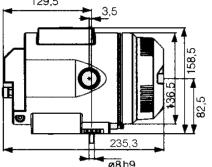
Explosion-proof/ Flameproof casing (dimensions in mm)
